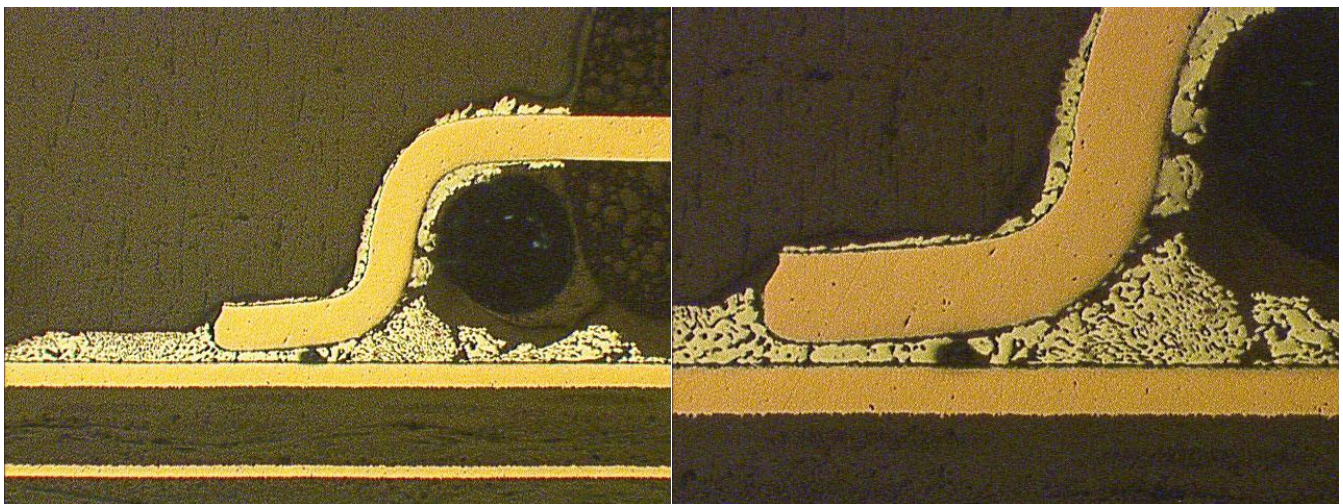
TQFP-144 Solder Joints, Board 9, Component U1, SnPb/Sn, Failed @ 1 Cycle
